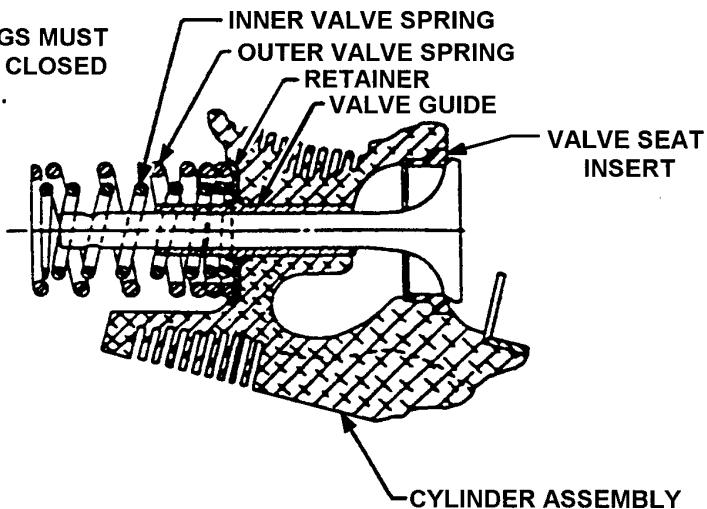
VALVE AND SPRING INSTALLATION
